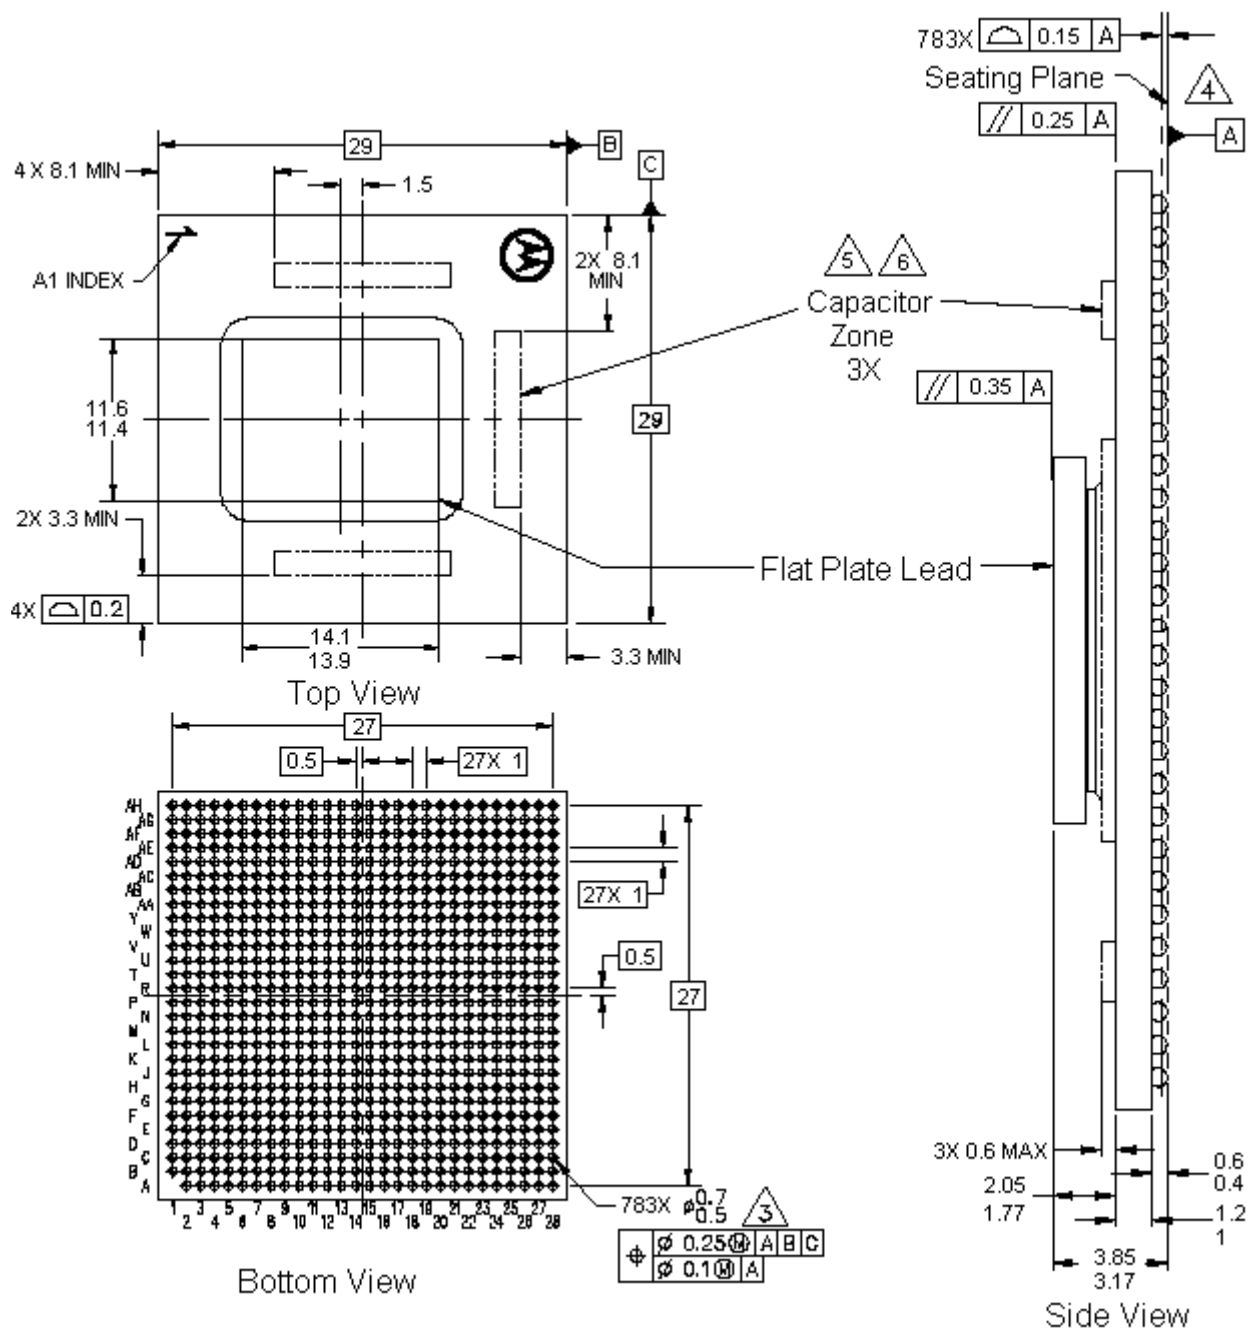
Mechanical Dimensions and Bottom Surface Nomenclature of the MPC8560 FC-PBGA
